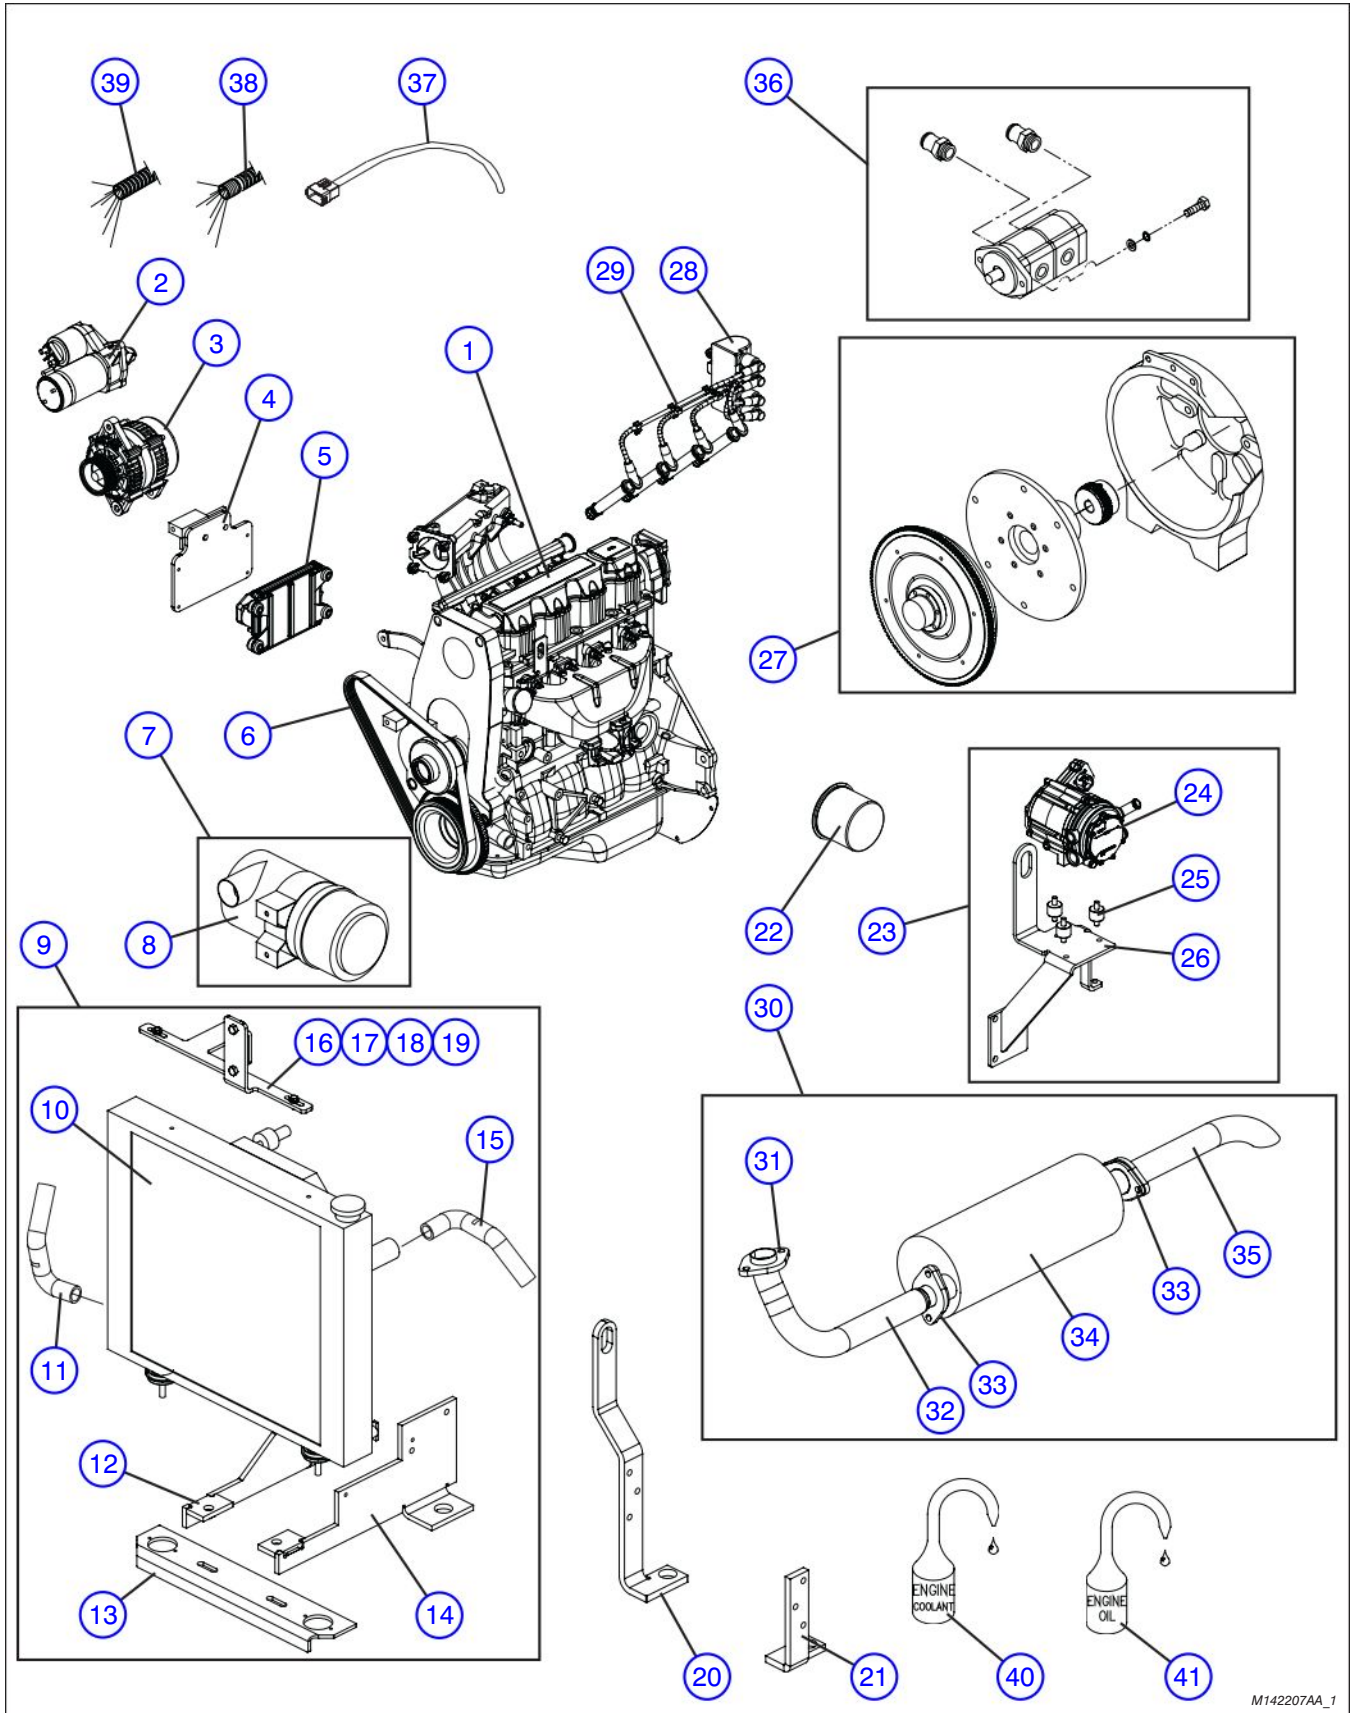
Engine Roll-Out Tray & Cover Assembly (GM Dual Fuel Engine) (Continued)
